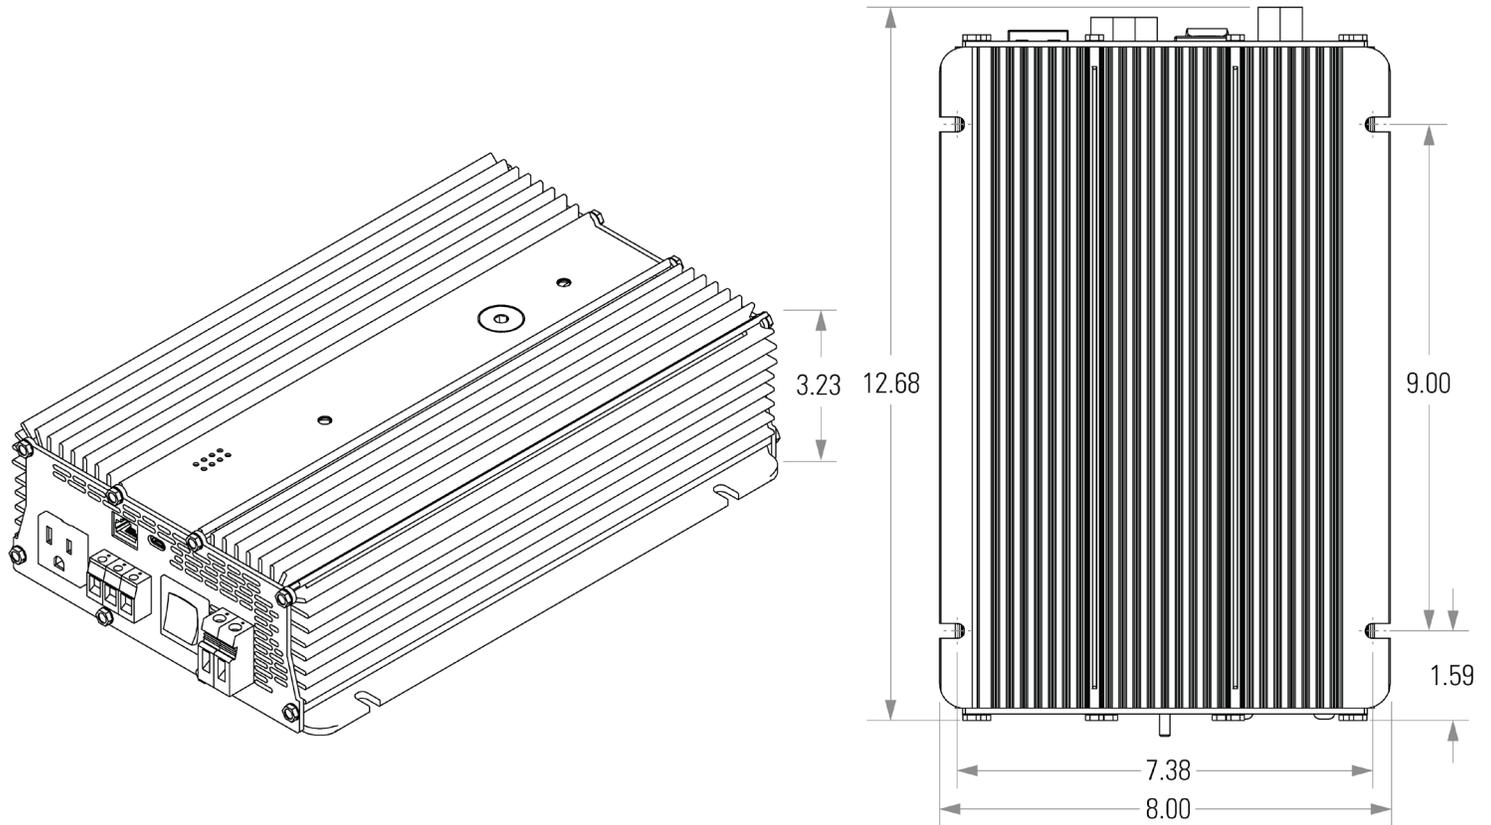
IPSi365 isometric and bottom view with dimensions in inches.
